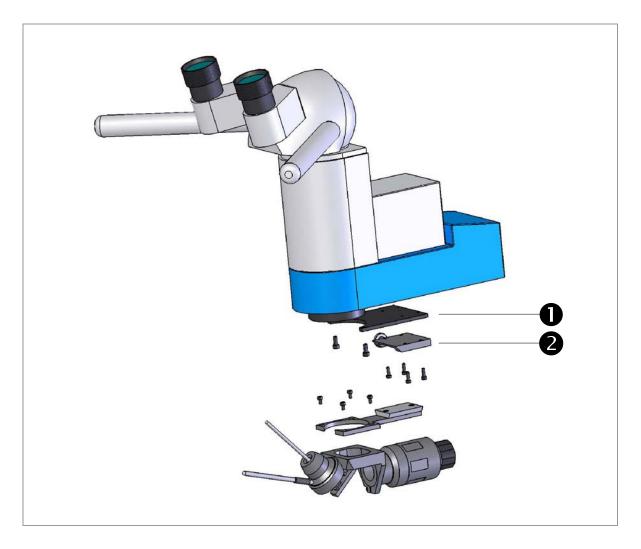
Exploded view of the Moeller-Wedel operating microscope with the MINI POINT
